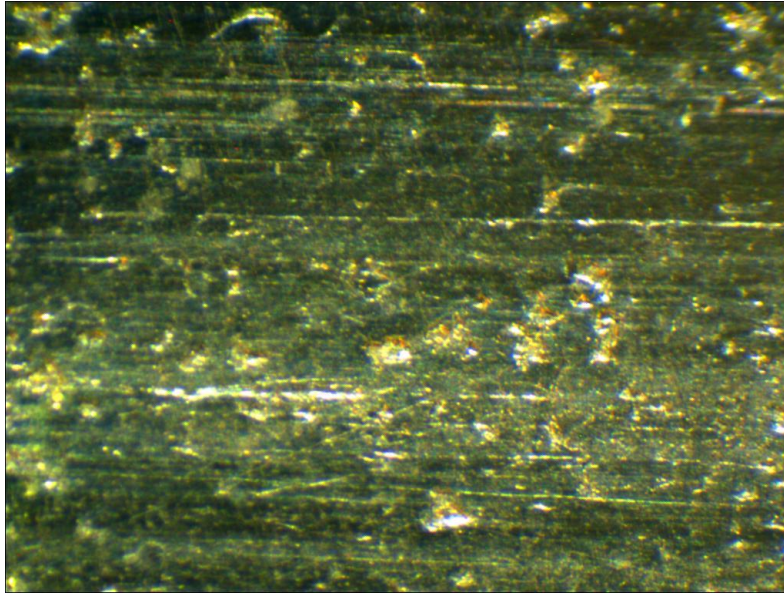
Surface of the conventional grooved bearing after rig test (x40)
